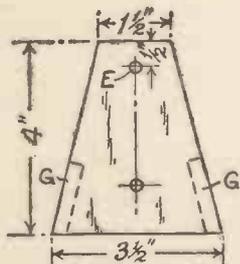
The Measurements of the Side Pieces, marked C C in the Finished Model.
